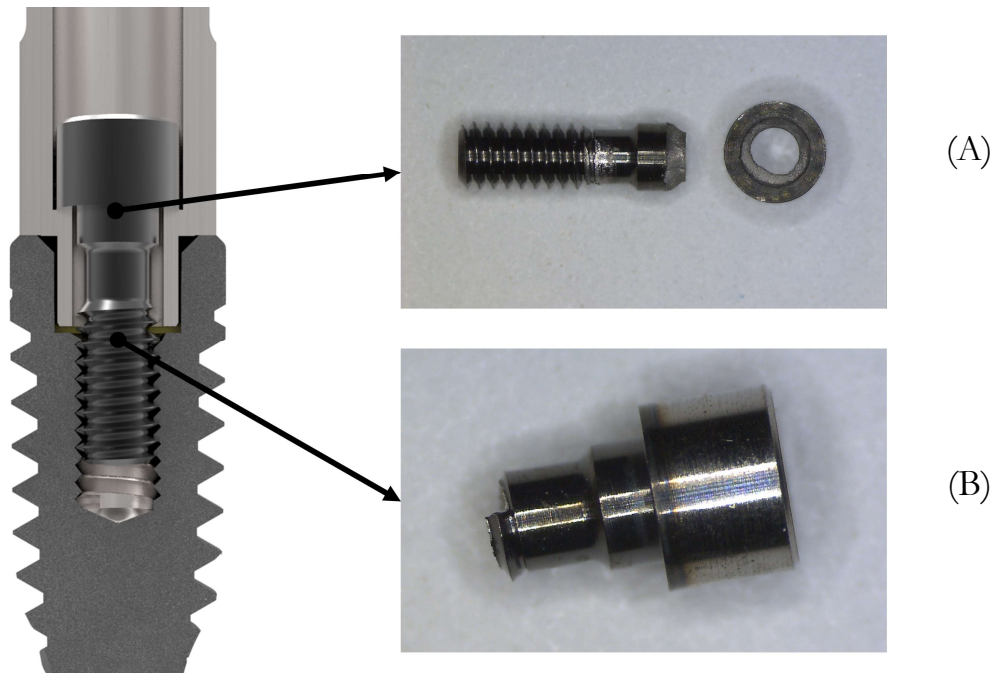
Fatigue failure sections on the prosthetic screws of IN-I4.5-P4.1. A, Screw head. B, First thread in contact.
